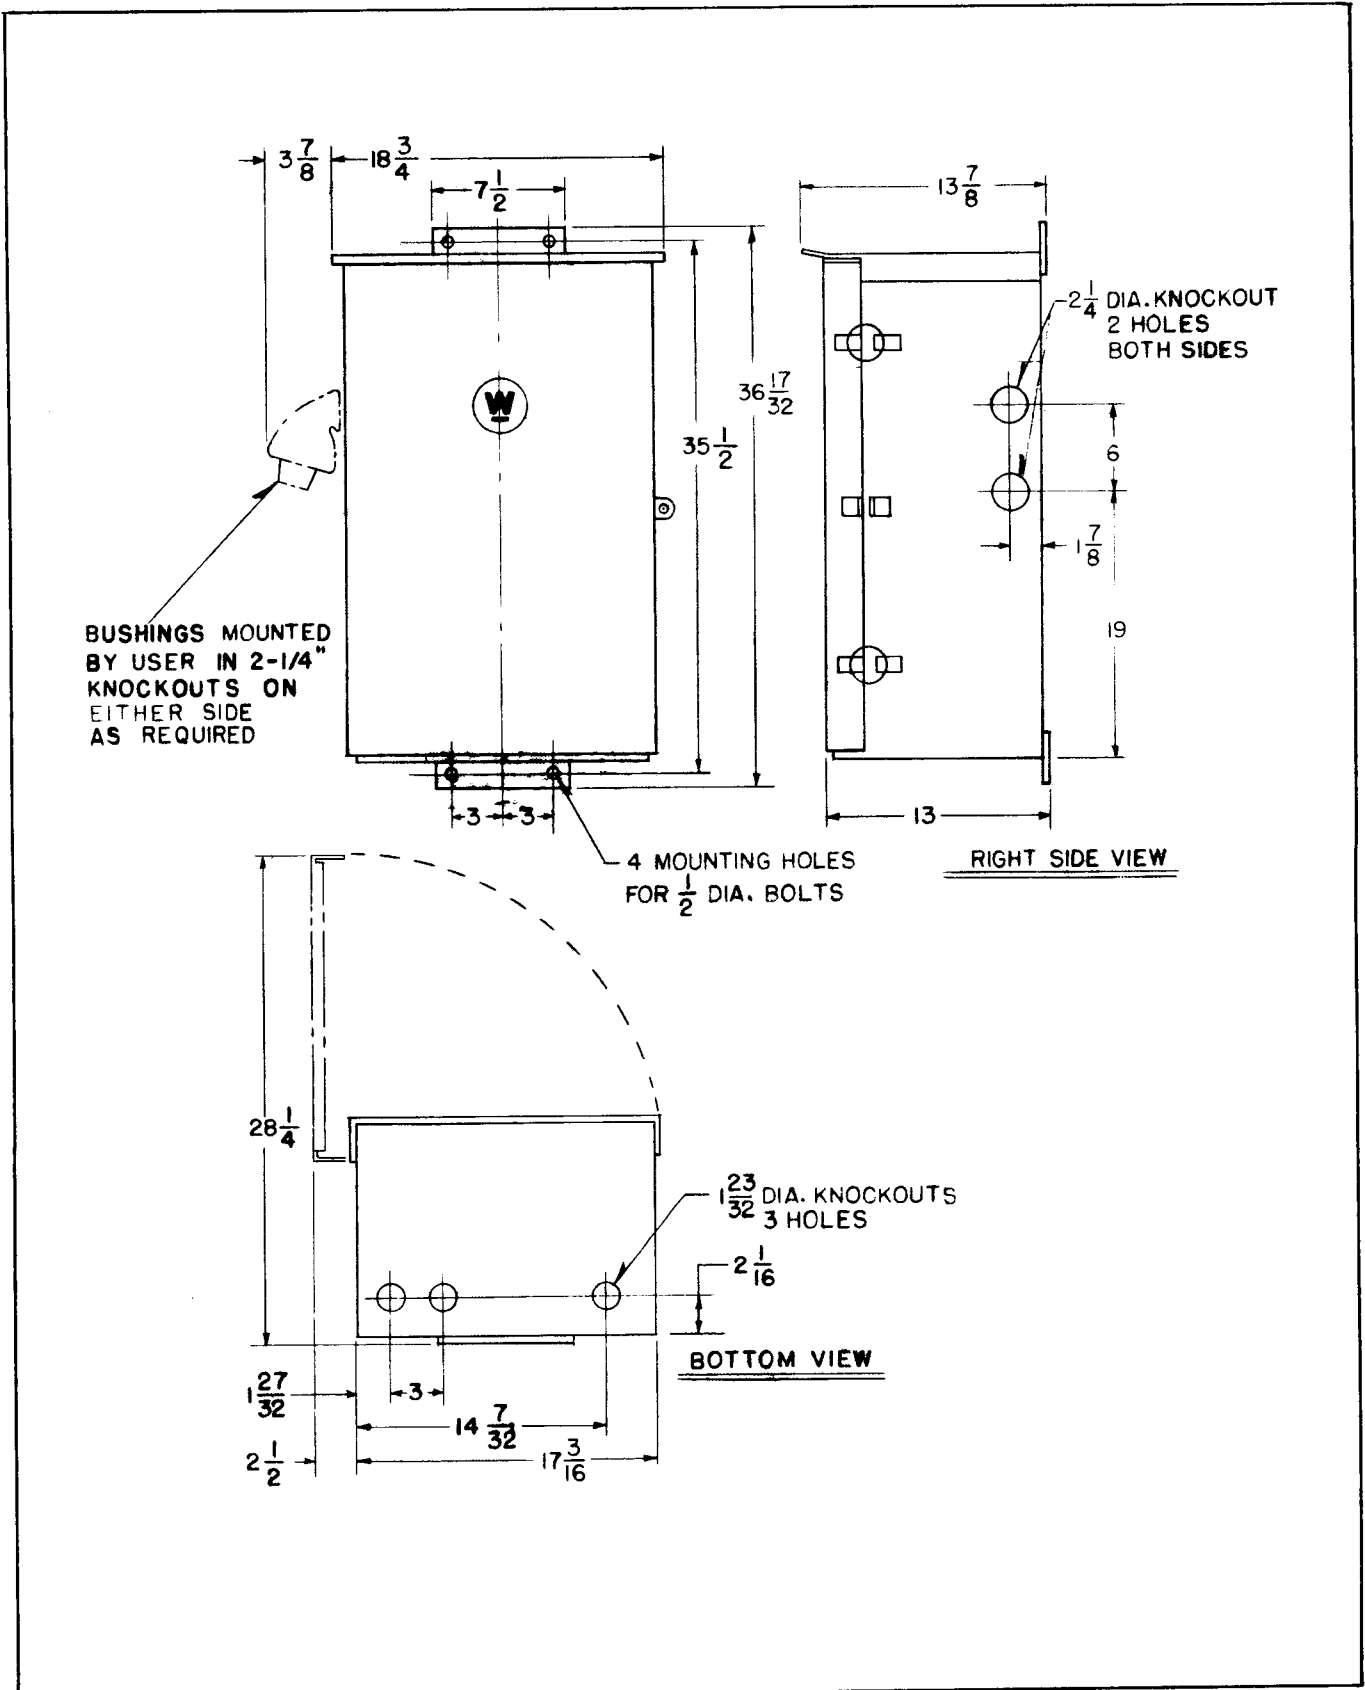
Outline Drawing (Dwg. 50-B-7683)
